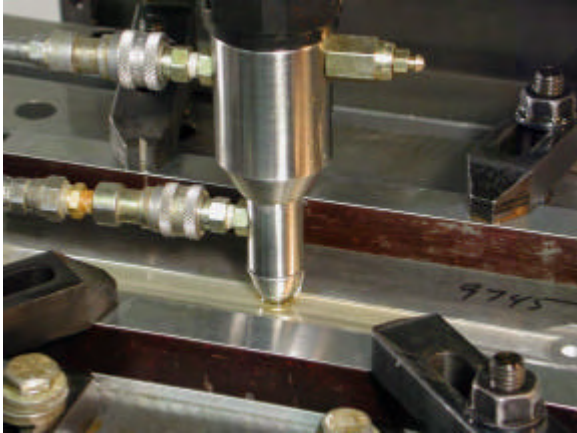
Photo of friction stir welded plate being low plasticity burnished with single ball tool.
